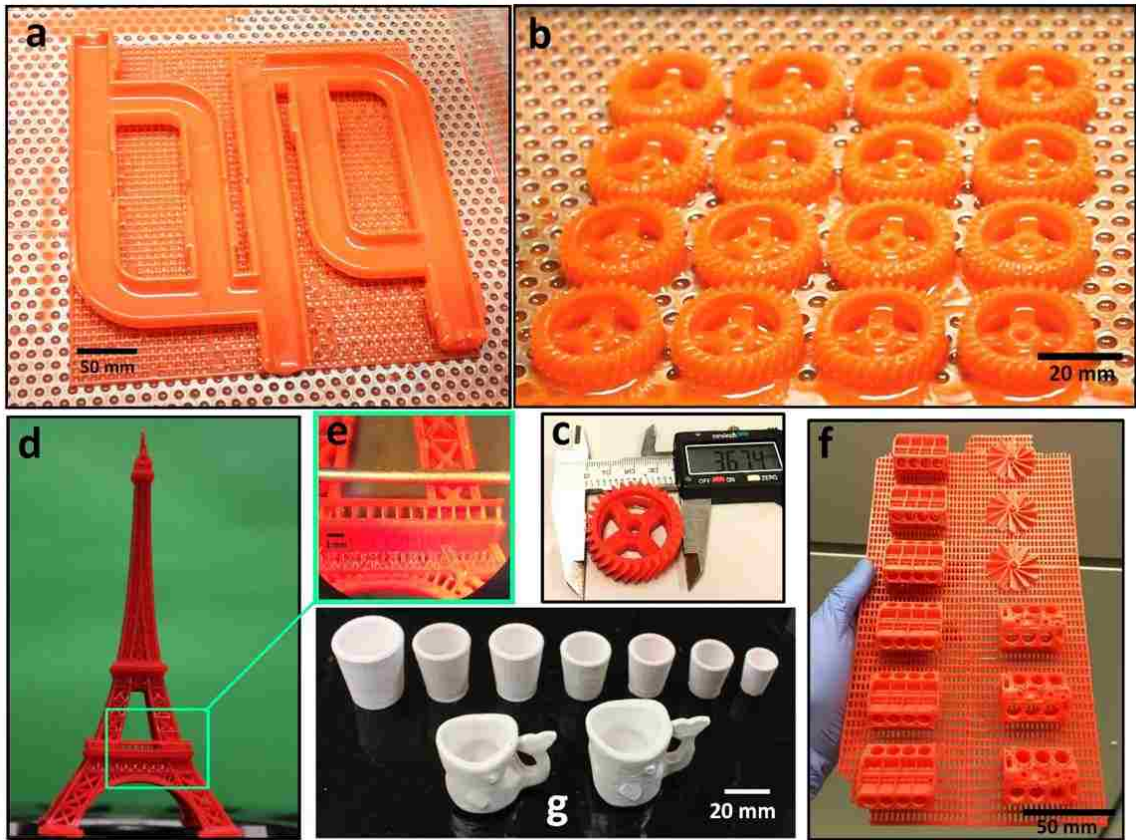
Printed samples: (a) A pipe network; (b) Batch of gears; (c) The measured size of a single gear from (b); (d) An Eiffel Tower; (e) The detailed features of the printed Eiffel Tower in (d); (f) A set of engine models; (g) Samples of the 3D-printed ceramic parts.
